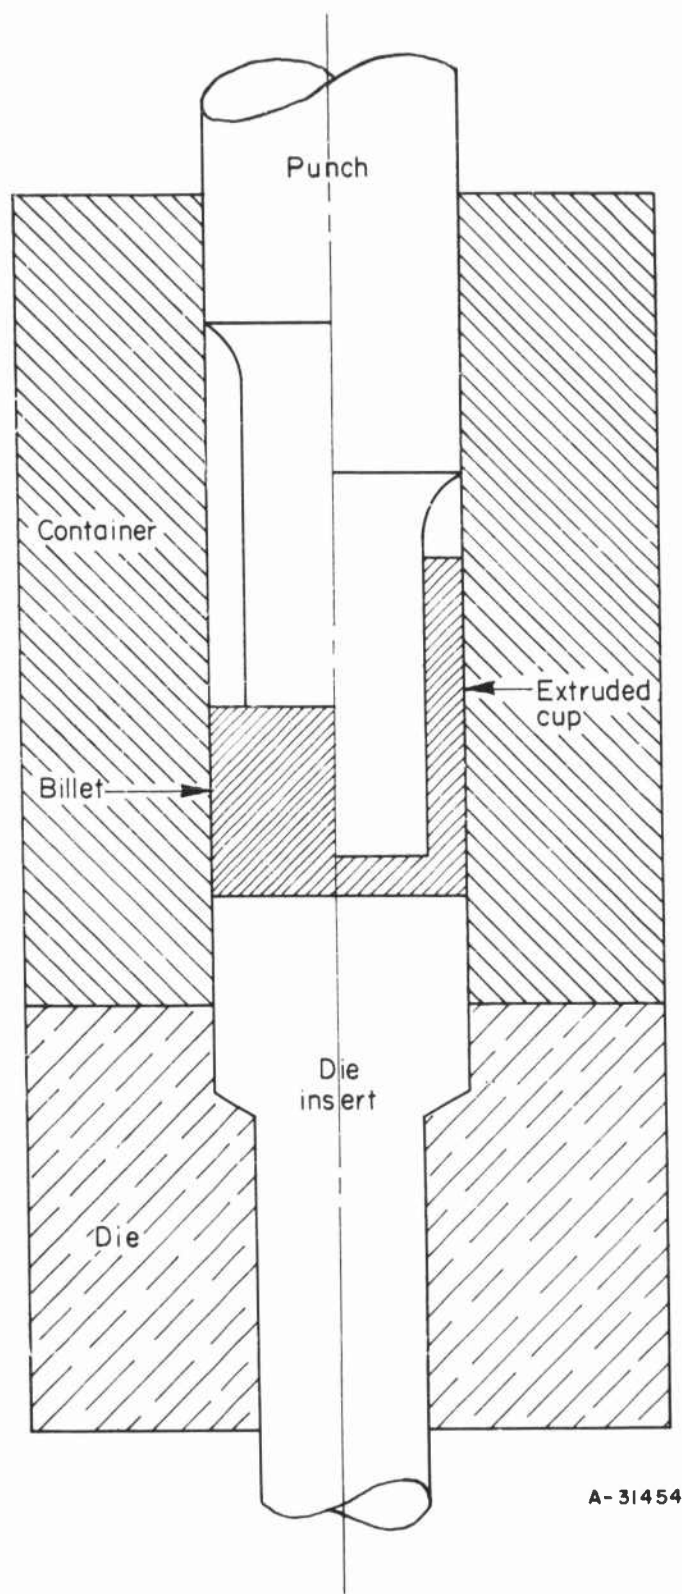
DIAGRAM OF TOOL LAYOUT FOR STUDIES ON BACKWARD EXTRUSION
